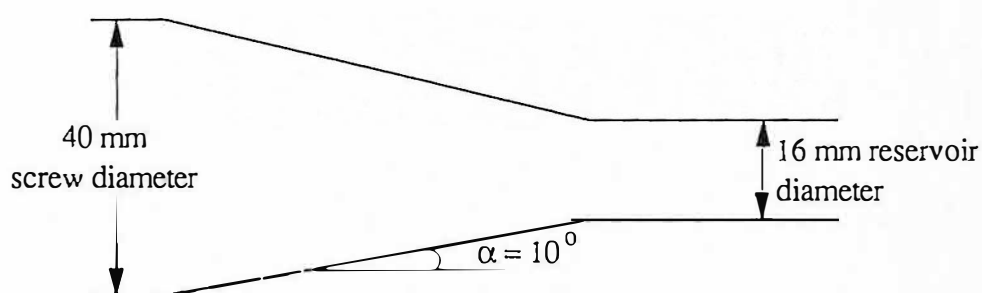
Sandretto series seven 60 tonne injection nozzle geometry
